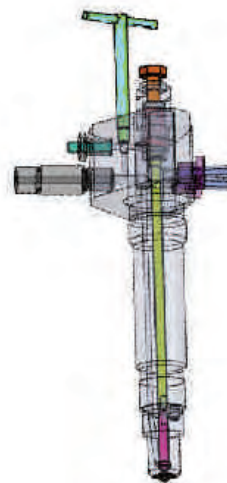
Edge geometric model of the injector of the investigated engine [11]
